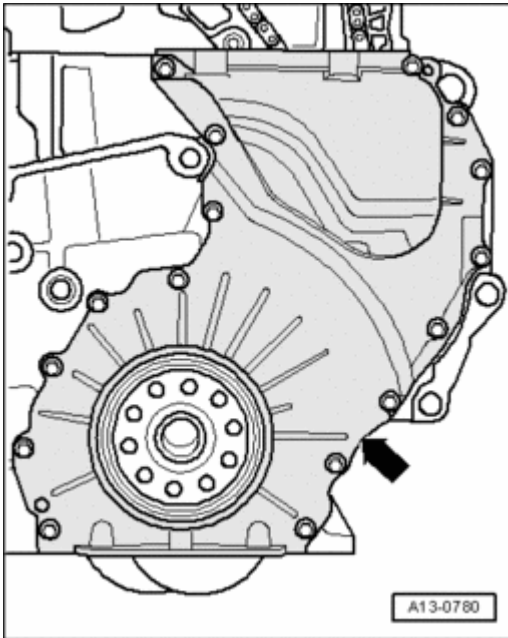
Removing Bolts And Lower Cover For Timing Chains Horizontally From Cylinder Block
